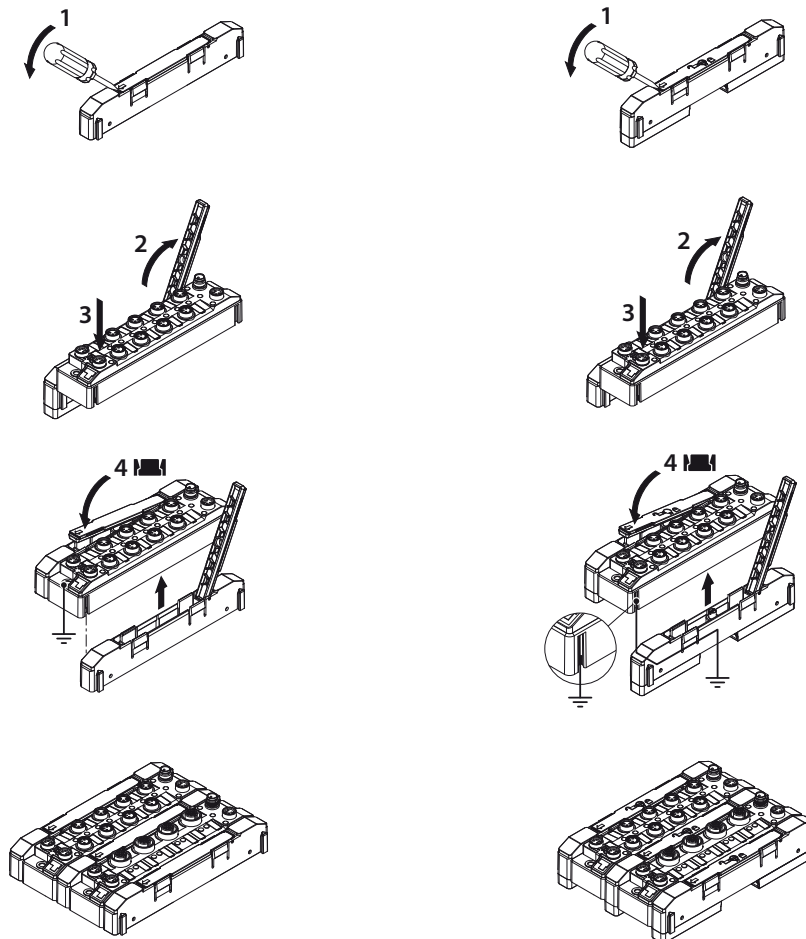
Build module groups four mounting the devices onto a mounting plate
